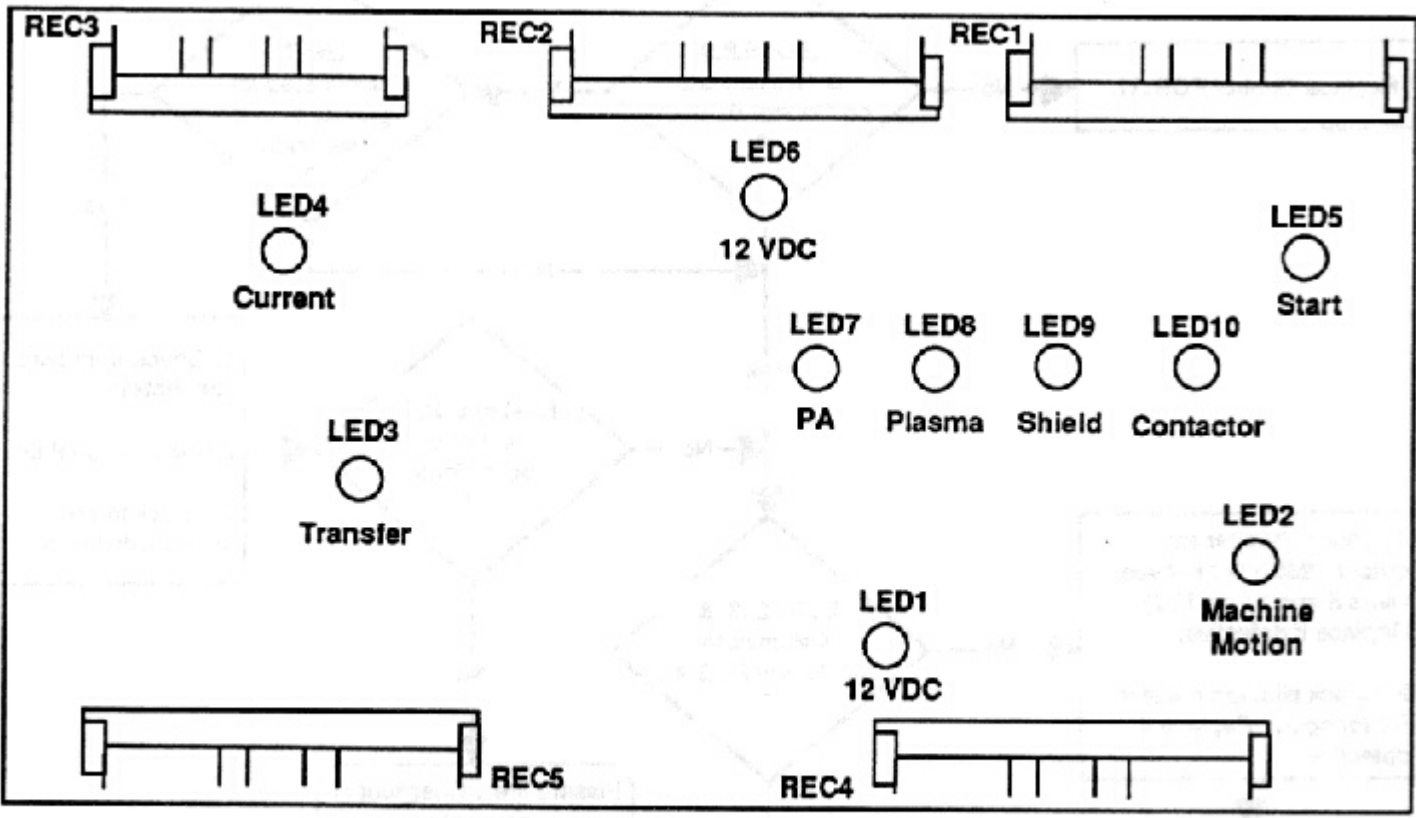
ArcWriter Control PCB A1 Assembly LED Locations
